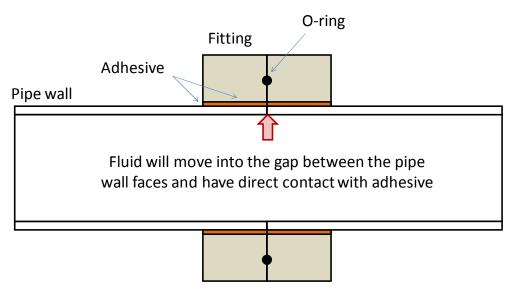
Schematic showing a common arrangement of using adhesive on FRP piping.
